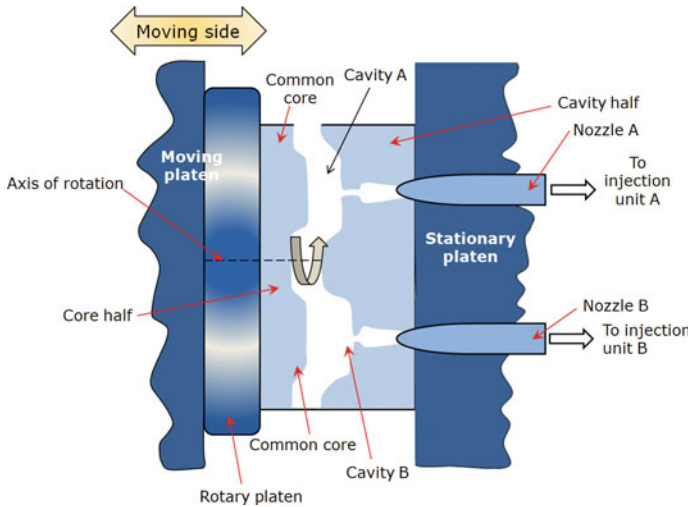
Schematized rotary platen multi-shot injection molding machine
